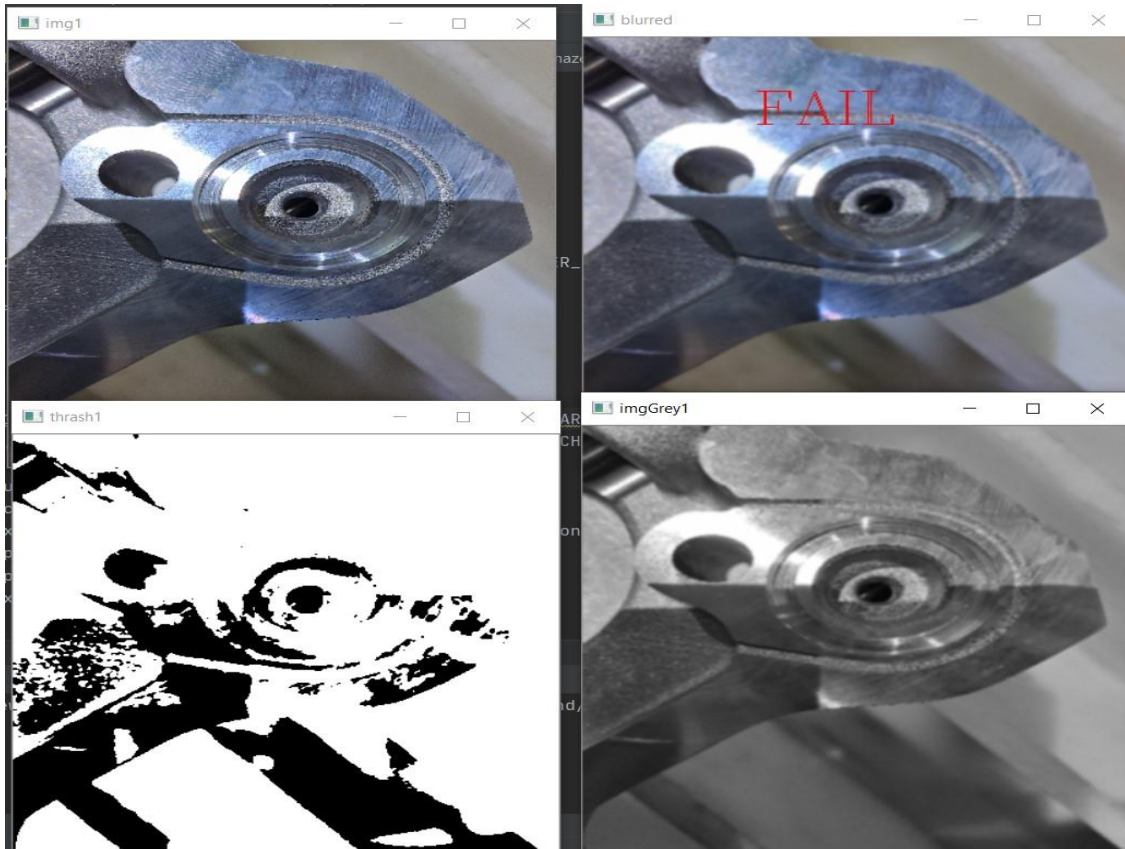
Gear Housing Without O-ring 'FAIL'
